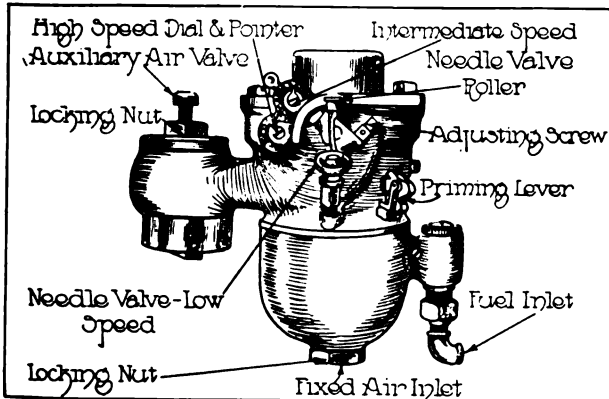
Model L Schebler Carburetor Having Three Fuel Adjustments.
